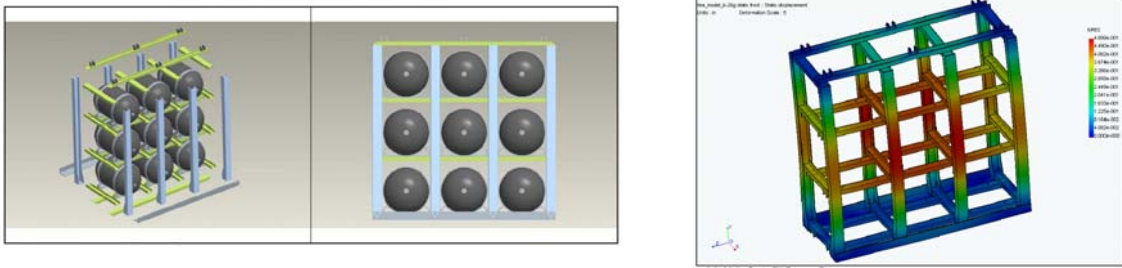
Finite element modeling of the trailer cylinder frame subjected to a 20 g load
